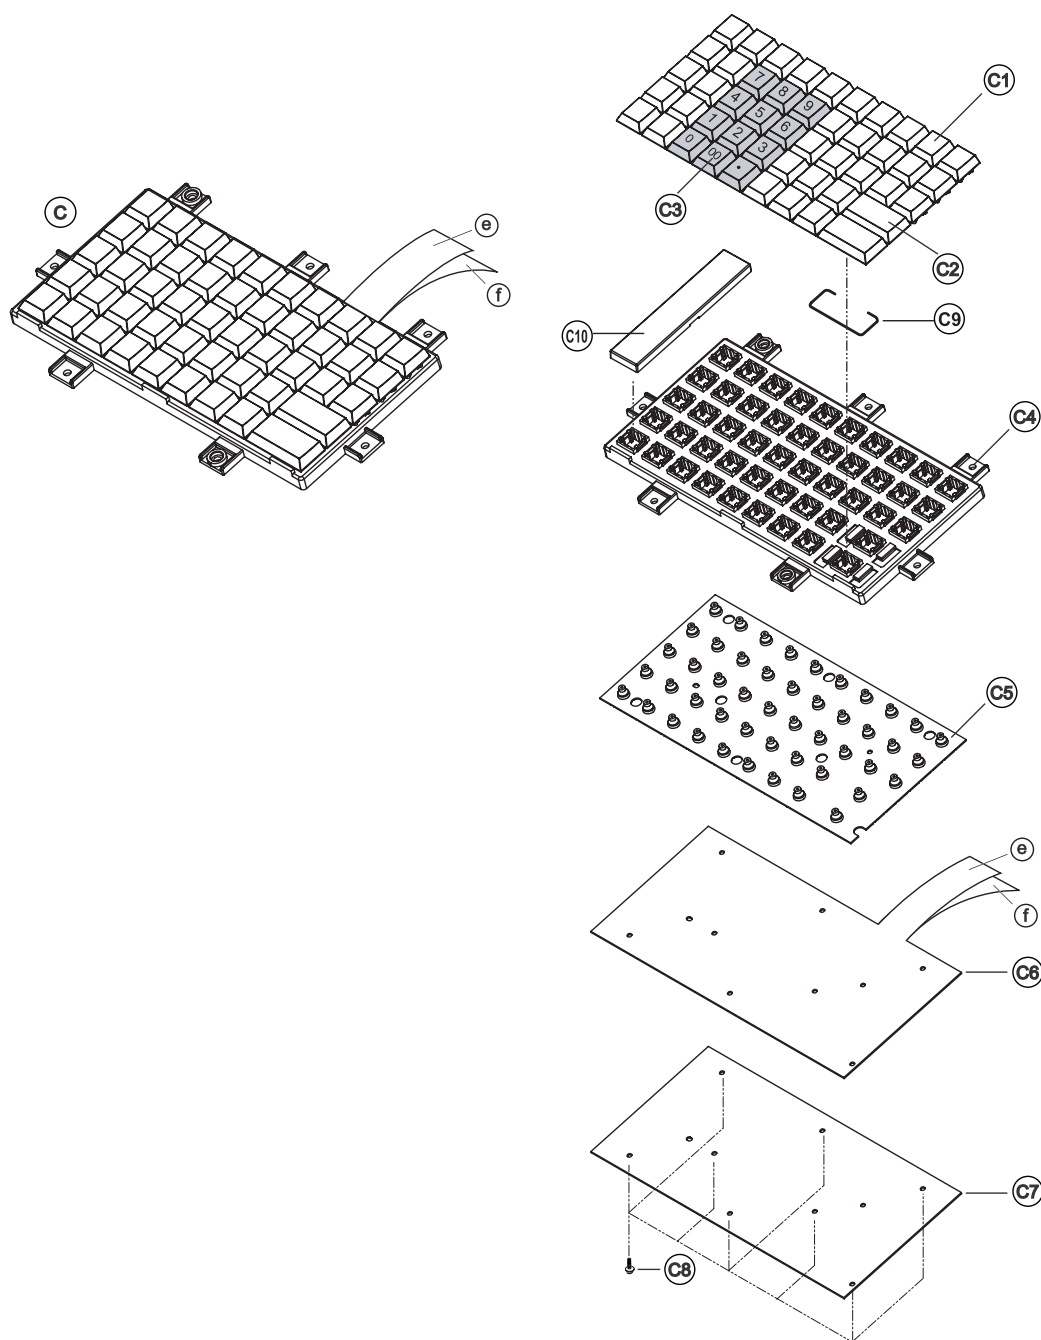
ASS'Y KEYBOARD (LASER PRINTING TYPE)
